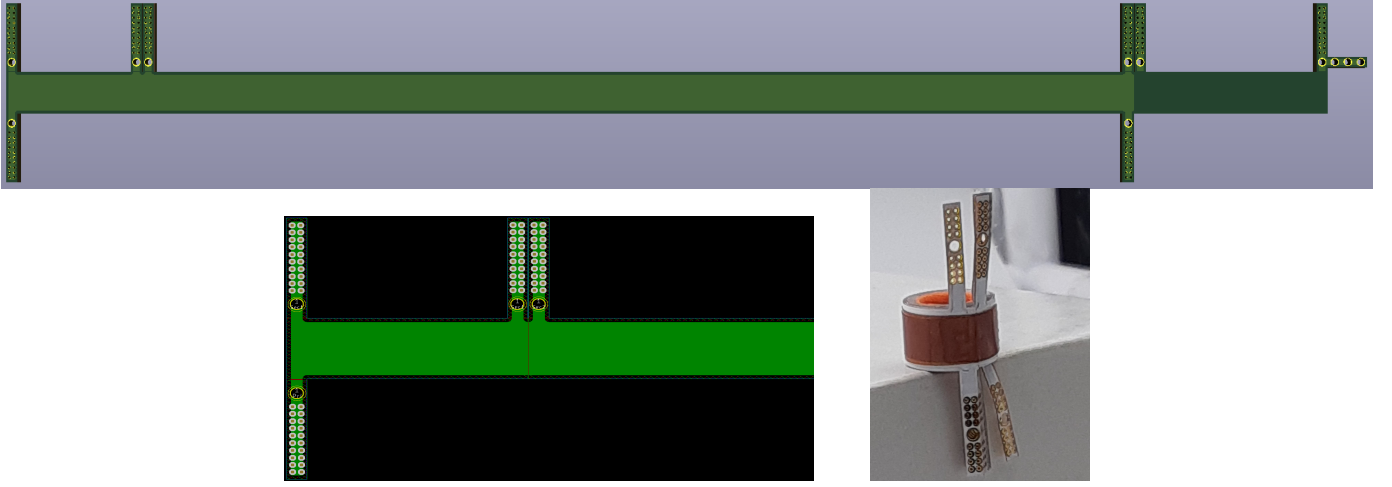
Top*, KiCAD 3D model of flex PCB showing the primary side with 7 turns in series. *Bottom left*, KiCAD layout view of the 1st parallel turn and 1st series turn of the secondary winding (green layer). *Bottom right*, wound flex PCB on a core bobbin.
